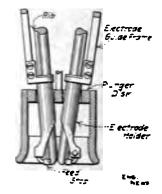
LOWER MECHANISM OF FLAMING ARC LAMP, BECK FLAMING LAMP CO.
